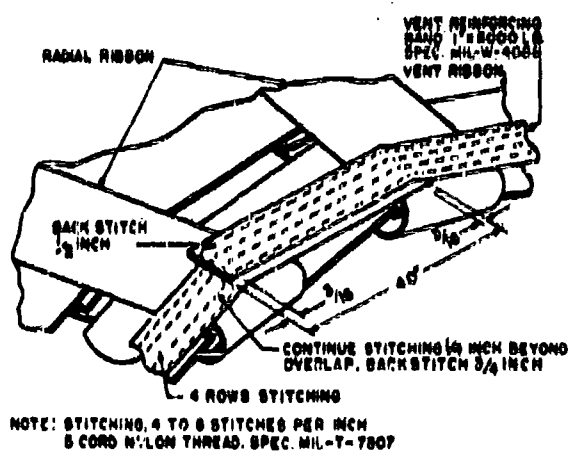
Vent Reinforcing Band, Overlap Stitching Detail, FIST Ribbon Type Parachute Canopy 8.61 Ft. Diameter
